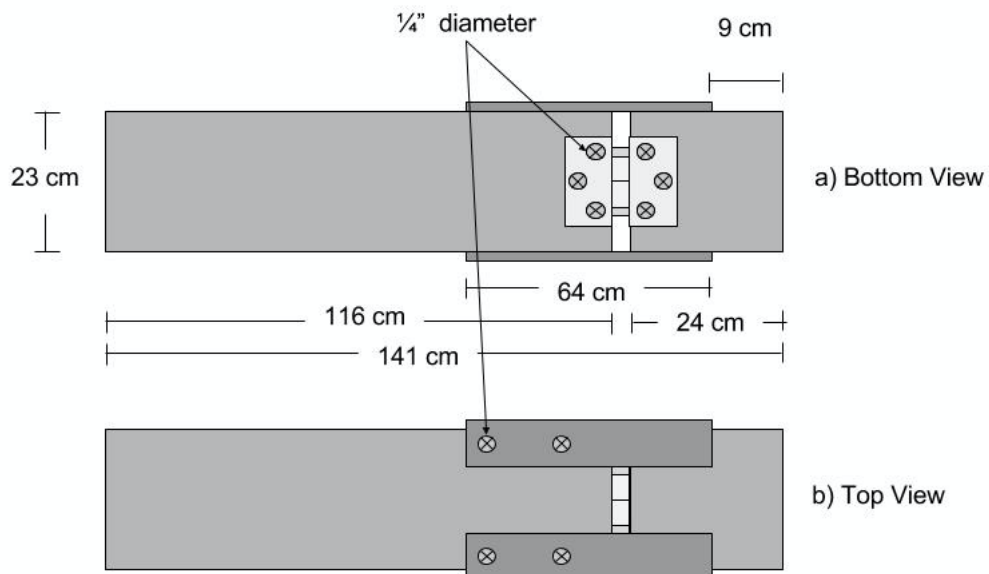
A detailed schematic including dimensions for the final design of the movable platform.
